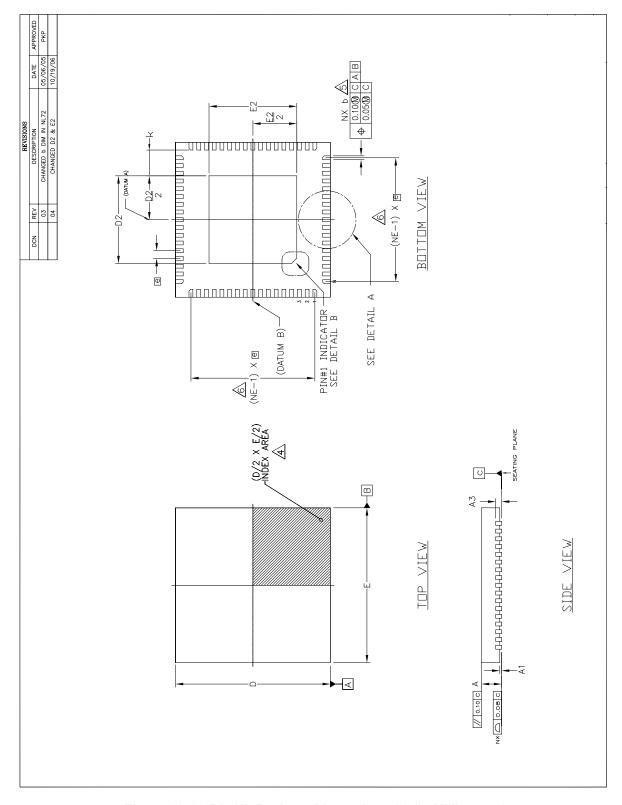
68-Pin NL Package Dimensions (a) (in Millimeters)
